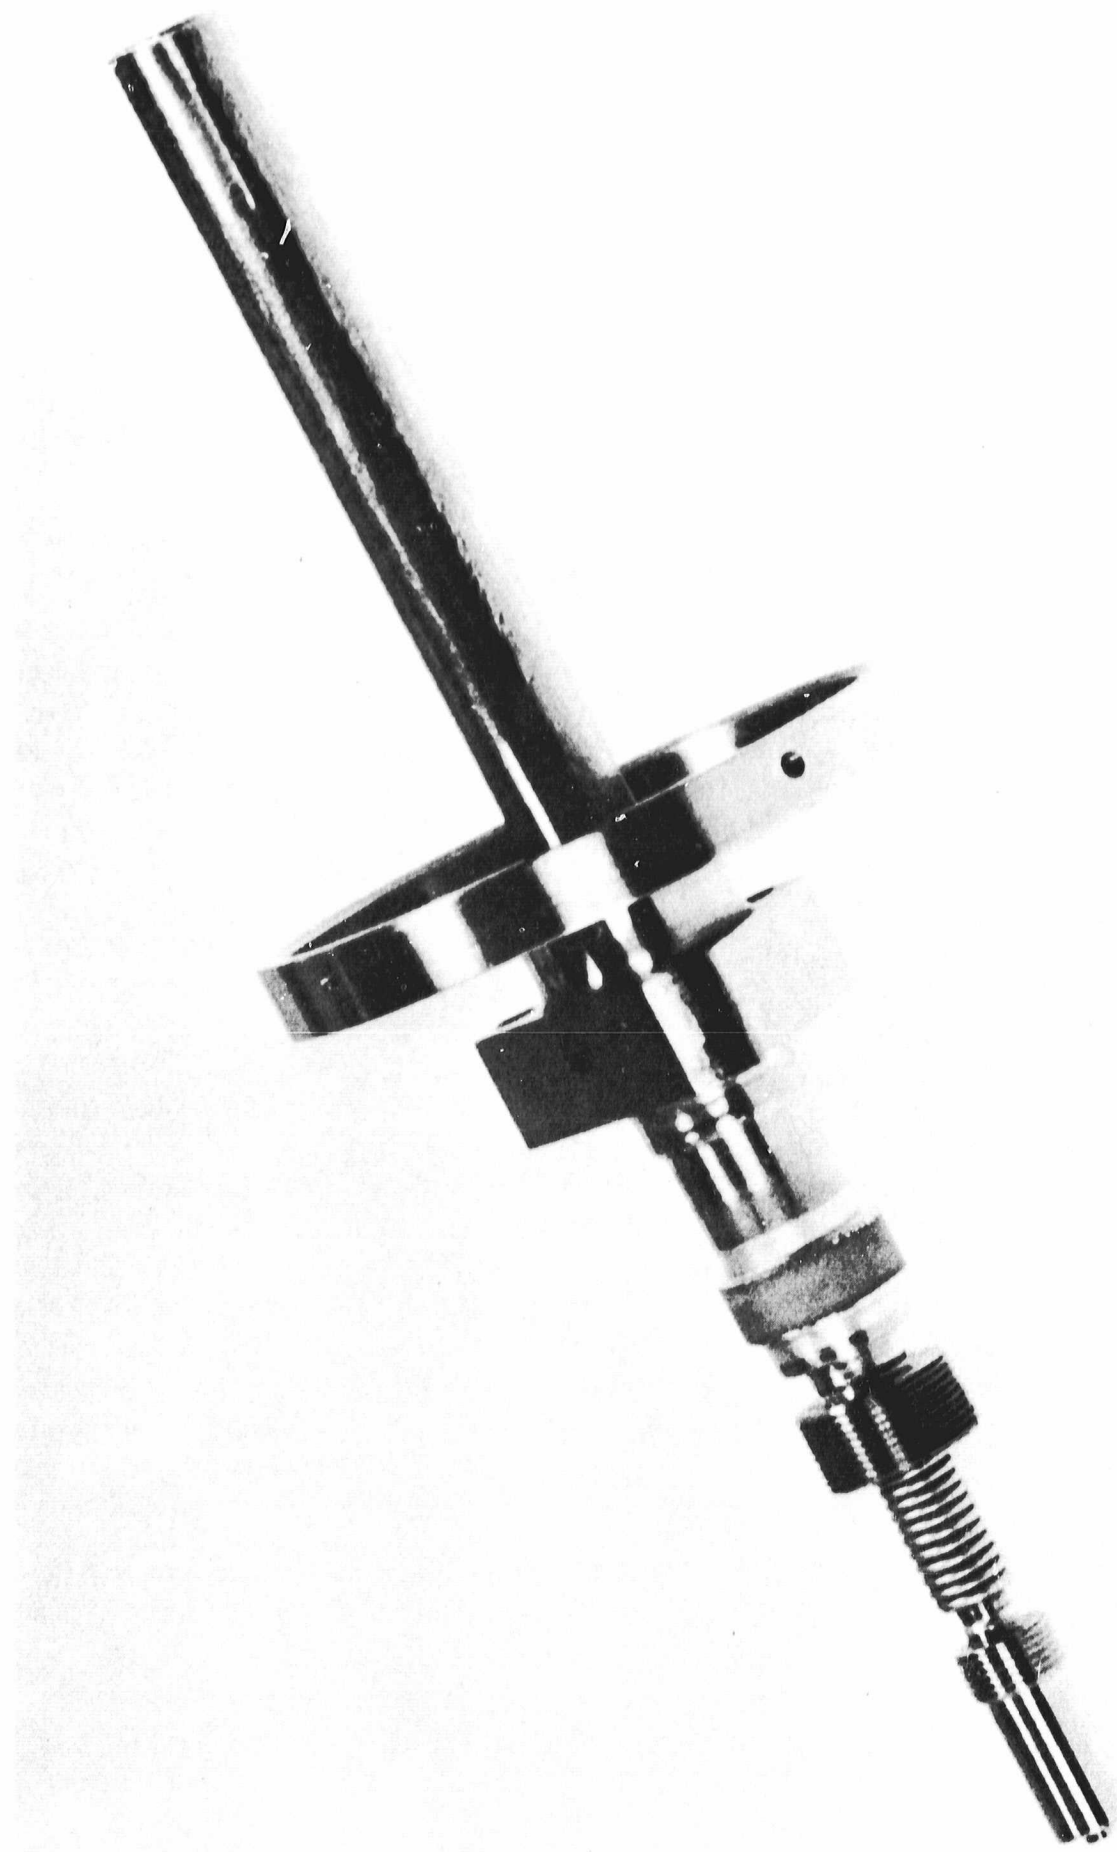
Model II After Welding and Brazing and Prior to Thermal Insulation
